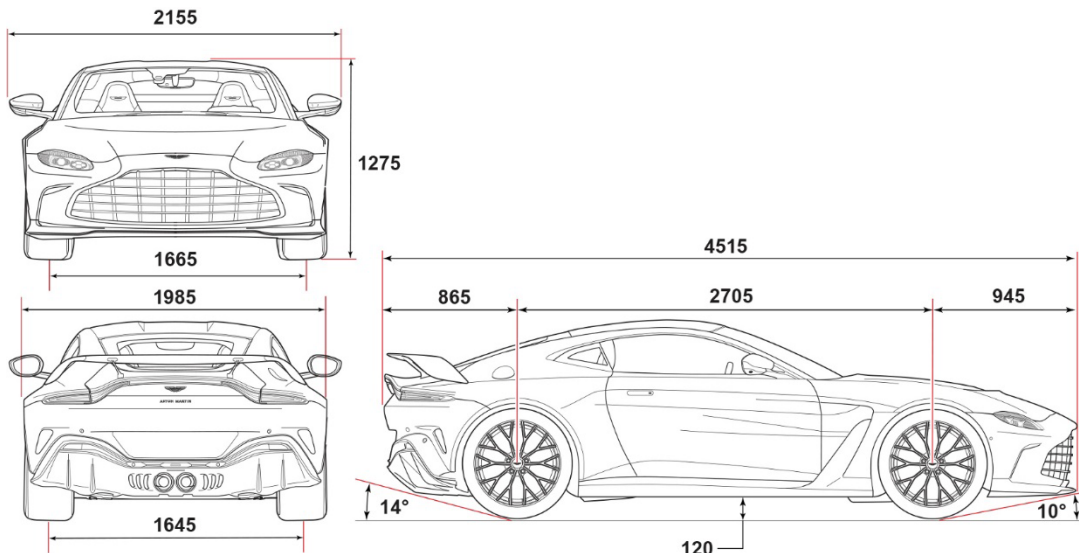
Coupe Exterior Dimensions (in millimetres)
